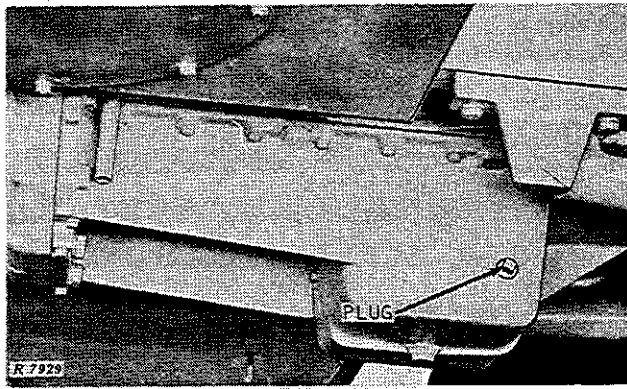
Plug for Crankcase Oil Heater Installation
